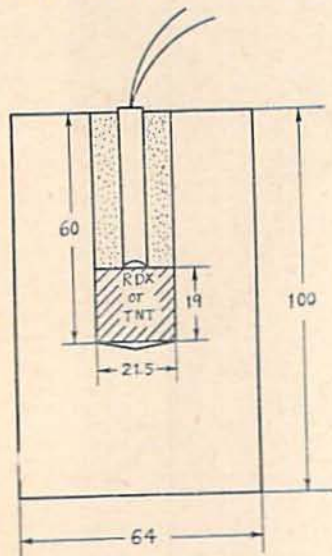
An internally loaded cylinder of mild steel with explosives (in mm unit).
